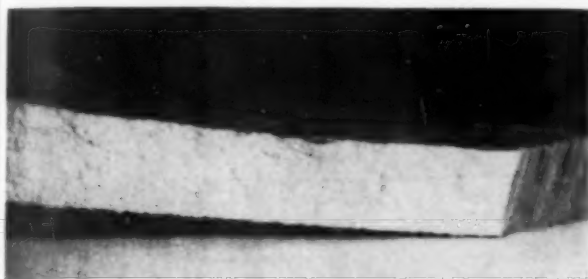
Fracture of a Casting With a Good Structure; Natural Size
